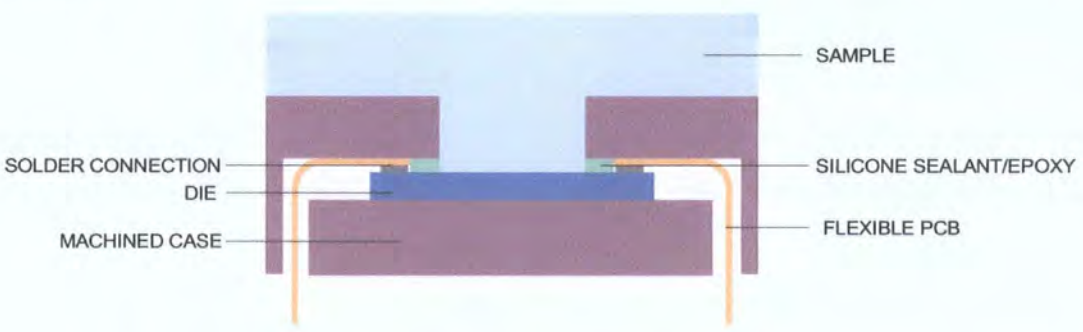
Cross section through flexible PCB package. A machined case with silicone sealant is illustrated, although a moulded case could be used.
